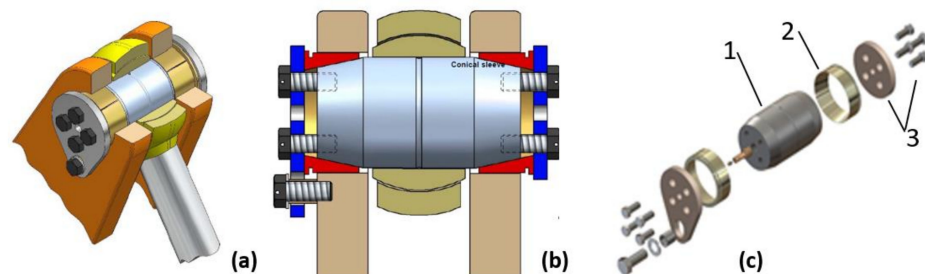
Expanding pin with single set of sleeves: (a) pin in joint, (b) cross-section view, and (c) exploded view.
